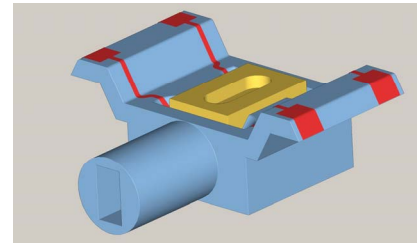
Layout of the MID housing; in red the connection for the soldering can be seen, on the left the inlet for the fluid is shown. The chip (yellow) is placed on the bottom.
